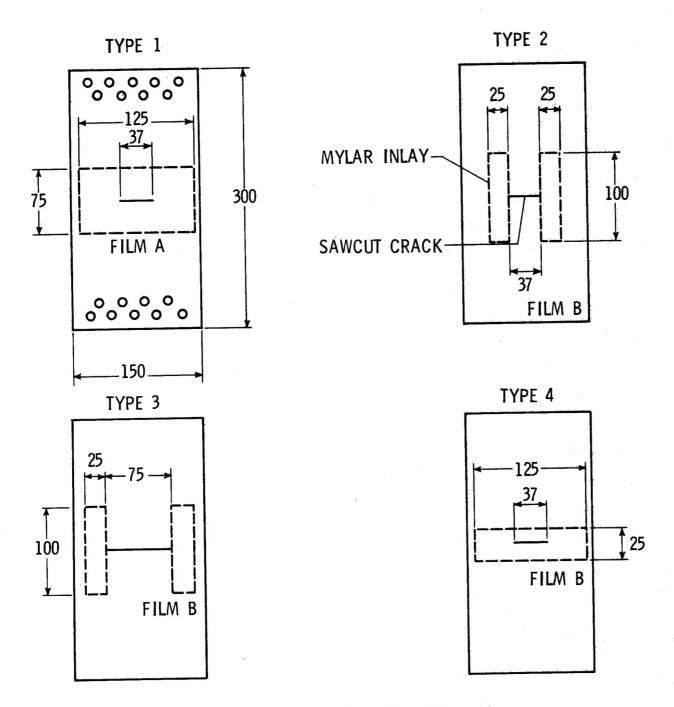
Fracture specimen configurations. (All dimensions are in millimeters.)
